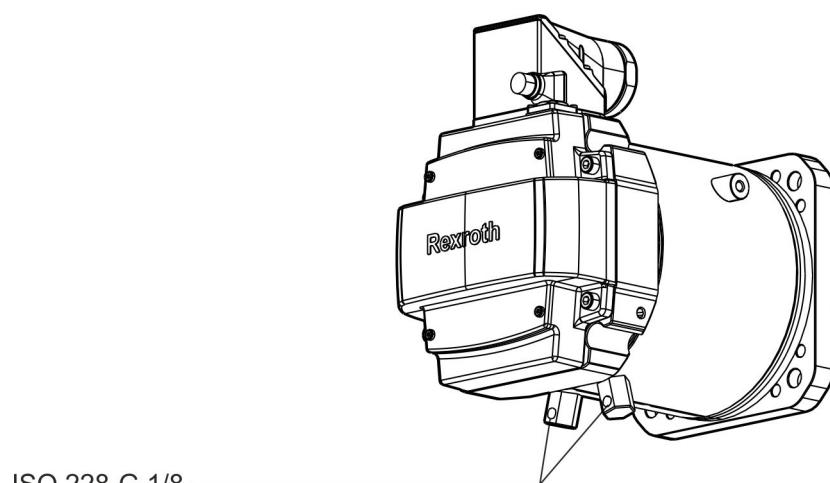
Coolant connection MS2N10-XXXXL-XXAXX
